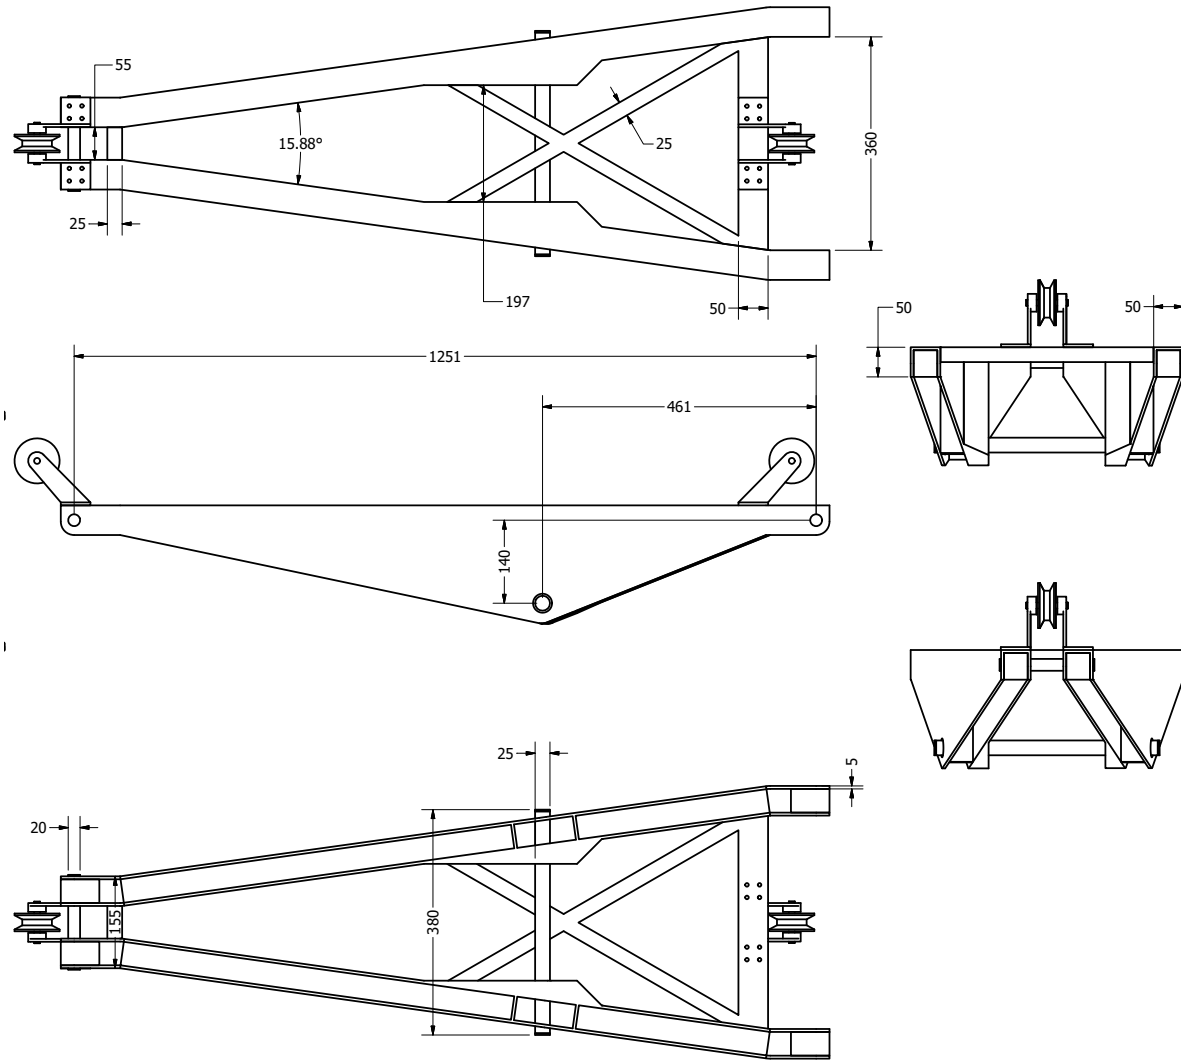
Short Lower Arm Final Design, all dimensions are in mm.
